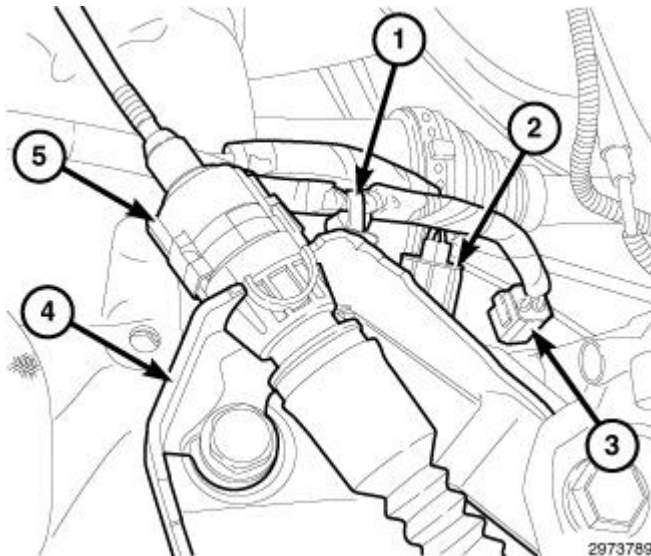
Output Shaft Speed Sensors Connectors, Bracket, Gearshift Cable & Retainers
